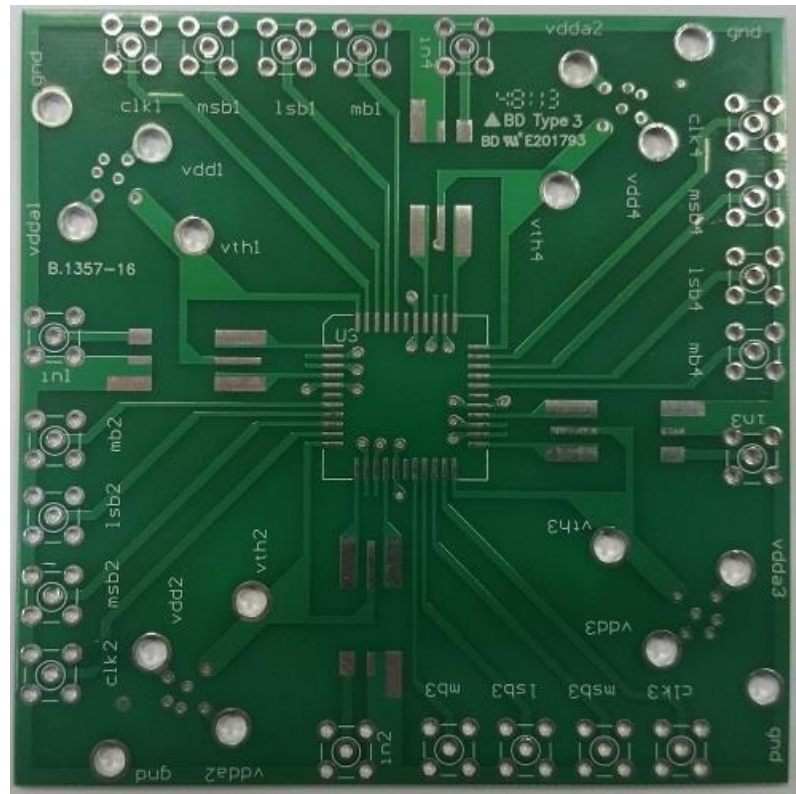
Produced test PCB for the 3rd order SD ADC.
